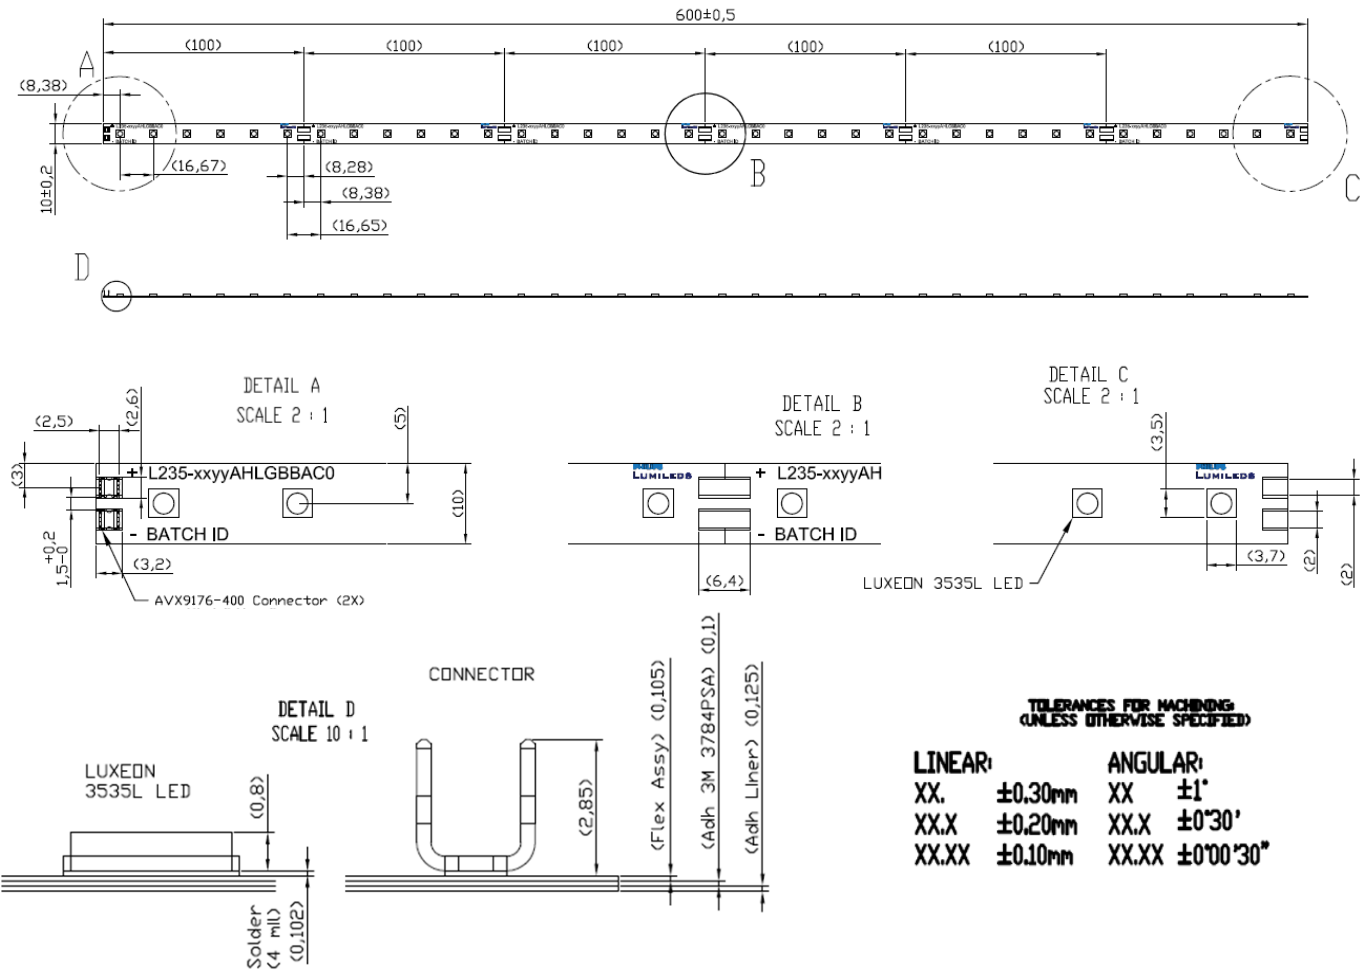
Mechanical drawing for L235-xyyyAHLGGBACO.
